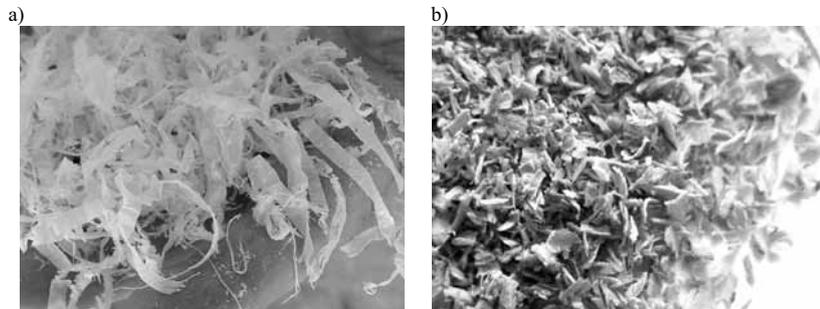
Examples of chip forms formed during wood sawing: a) continuous chips, b) fine chips and sawdust
